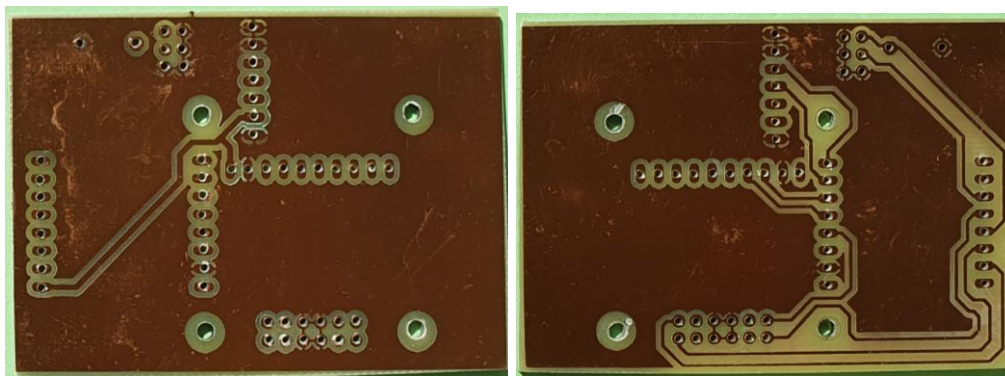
On-board Circuit Printed Board. Top layer on the left and bottom layer on the right.
